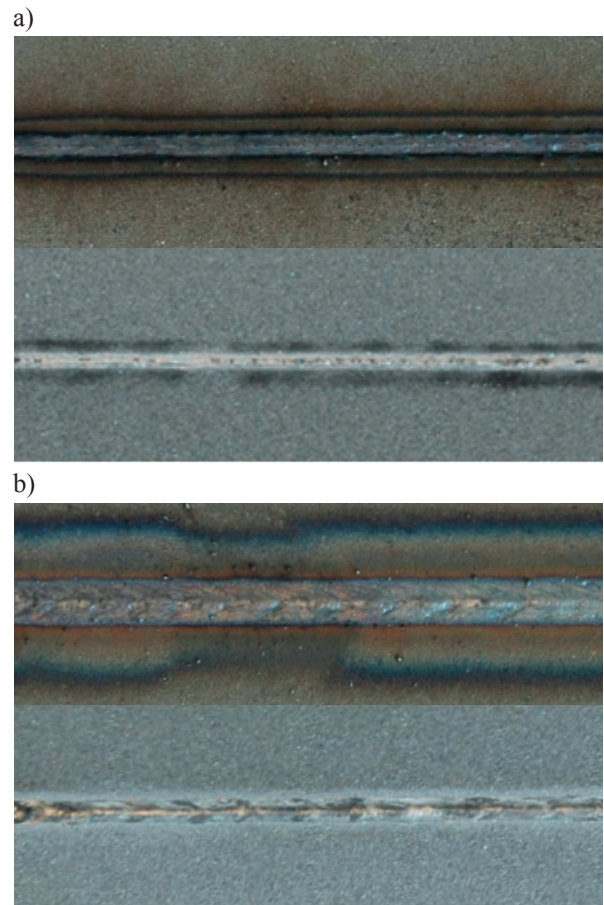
A view of the weld face (top surfaces) and root (bottom) of the 5.0 mm thick butt joints of S700MC steel produced by autogenous laser welding (Table 4); a) at minimum heat input of 132 J/mm (3.3 kW, 1.5 m/min), joint A and b) at maximum heat input of 300 J/mm (2.5 kW, 0.5 m/min), joint B
